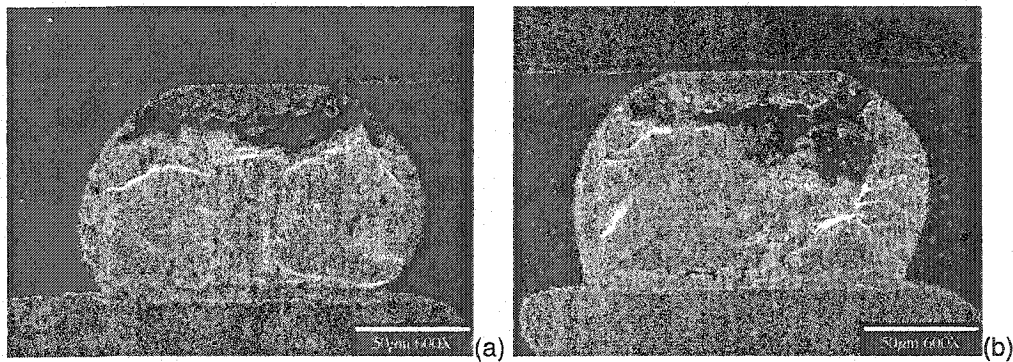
Secondary SEM of (a) solder joint A ($0.64 \times 10^4 A/cm^2$) (b) solder joint B ($0.68 \times 10^4 A/cm^2$) on Module #51 after 168 hrs 1A stressing
